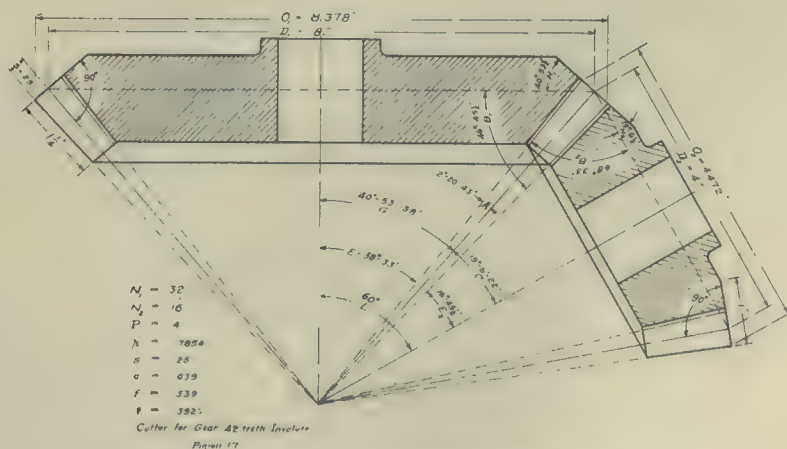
Pair of Bevel Gears, Shafts Acute.
